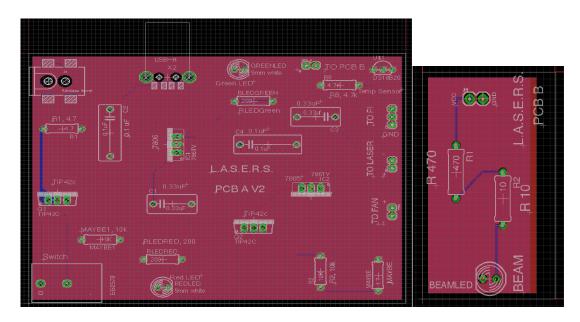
PCB A (left) and PCB B (right) Layout in Eagle
